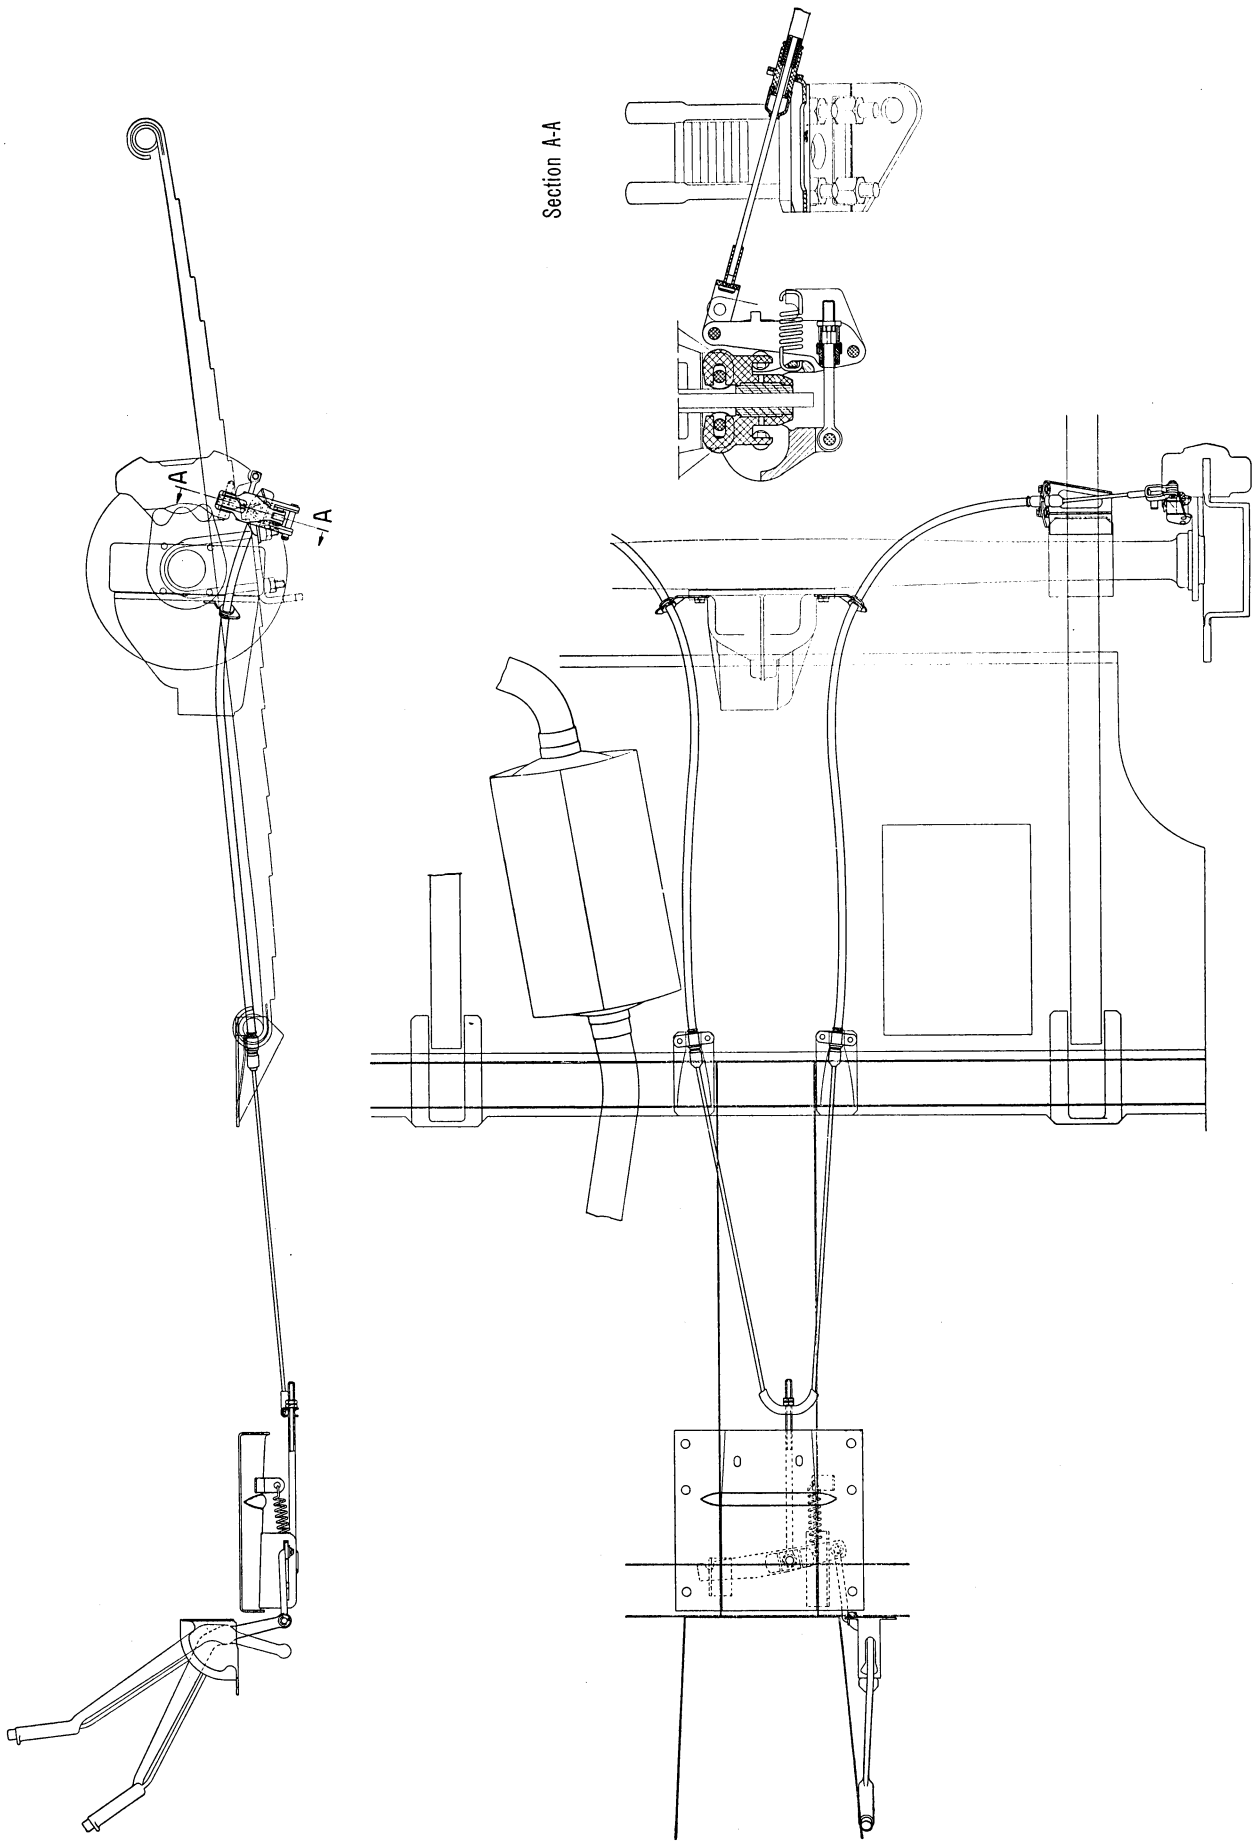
Layout of manual brake assembly with detail of actuating mechanism on rear wheel disc.
